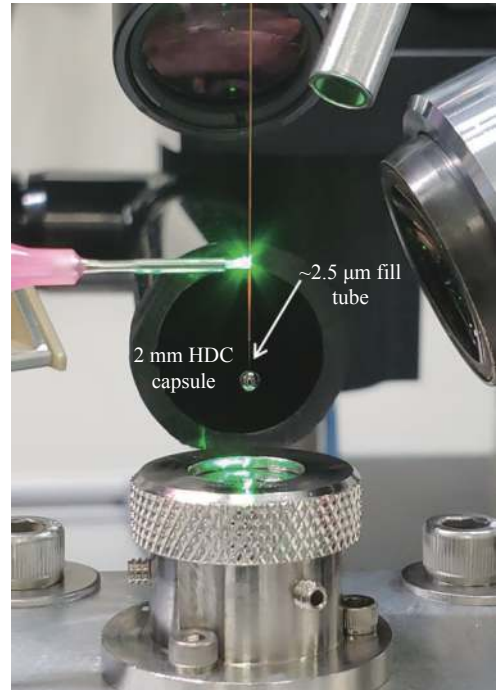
Assembly of  $\phi 2.5\ \mu\text{m}$  fill tube and capsule
